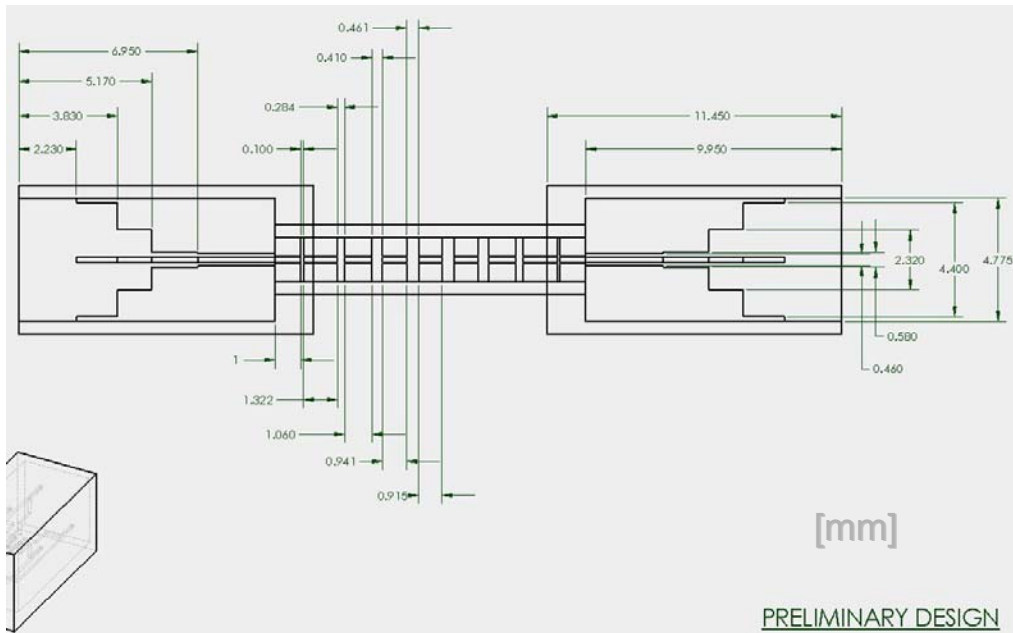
Dimensions of the transformer assembled to the filter (dimensions are in mm).
